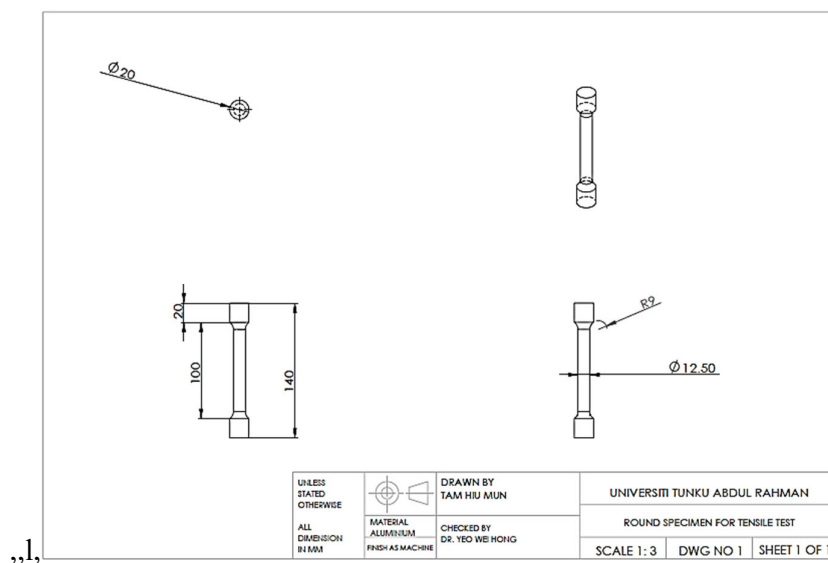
Engineering drawing of the samples (Tam, 2019)
